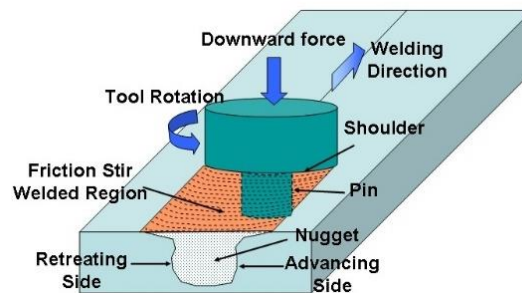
Schematic of friction stir welding/processing process [115].
